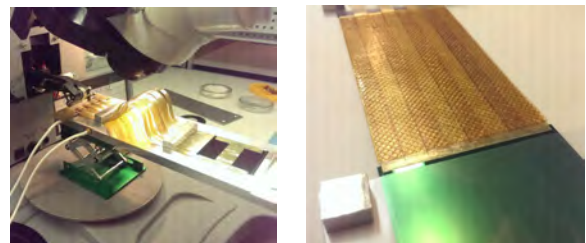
Custom-designed tooling for mounting ASICs onto FEBs (left); view of adjusted meshed spacers on the read-out cables (right).
